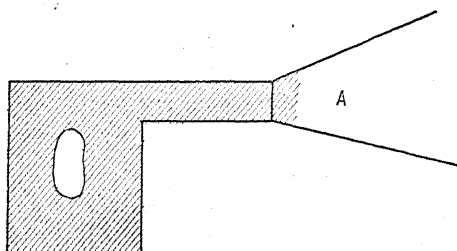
DIE CASTING CONTAINING SHRINKAGE HOLE.
